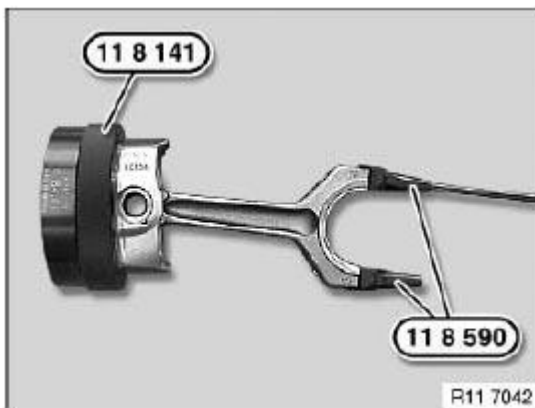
Identifying Special Tool (11 8 141) And (11 8 590)
